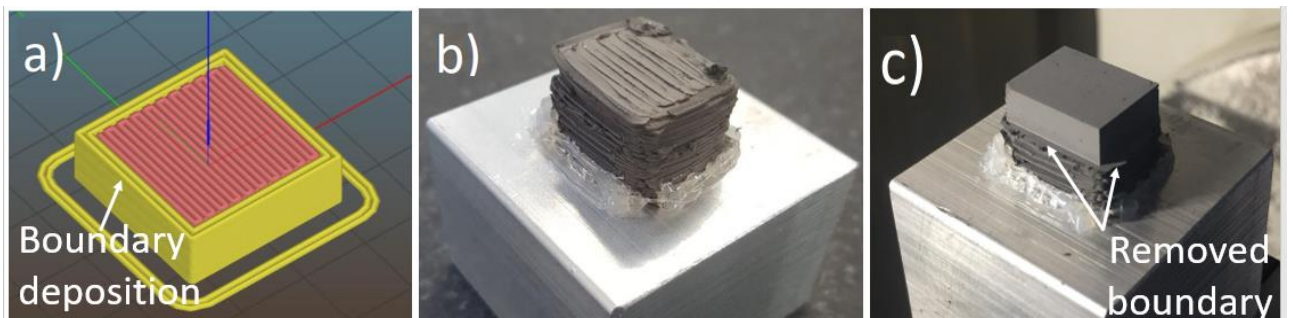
Workpiece preparation a) Strategy used for AM, b) Workpiece produced by AM in green-state, c) AM workpiece after face milling and side milling operations
